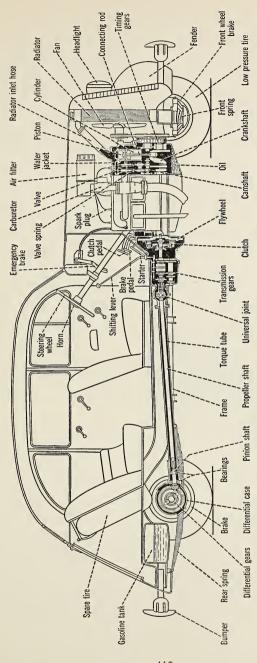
This is the way your father's car might look if you took a long saw and cut the car entirely through from front end to rear end. Some important pieces through which you would cut include the bumper, radiator, fan, pistons, cylinders, flywheel, universal joints, propeller shaft (or drive shaft), differential, gasoline tank, and rear bumper. Of course you would cut through the body and seats, too.
